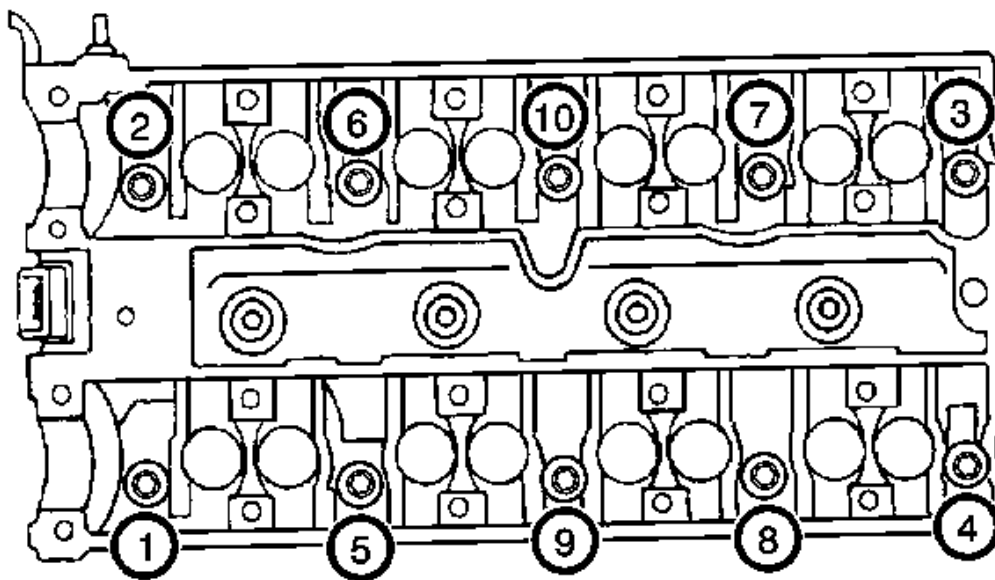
View Of Cylinder Head Bolt Removal Sequence
